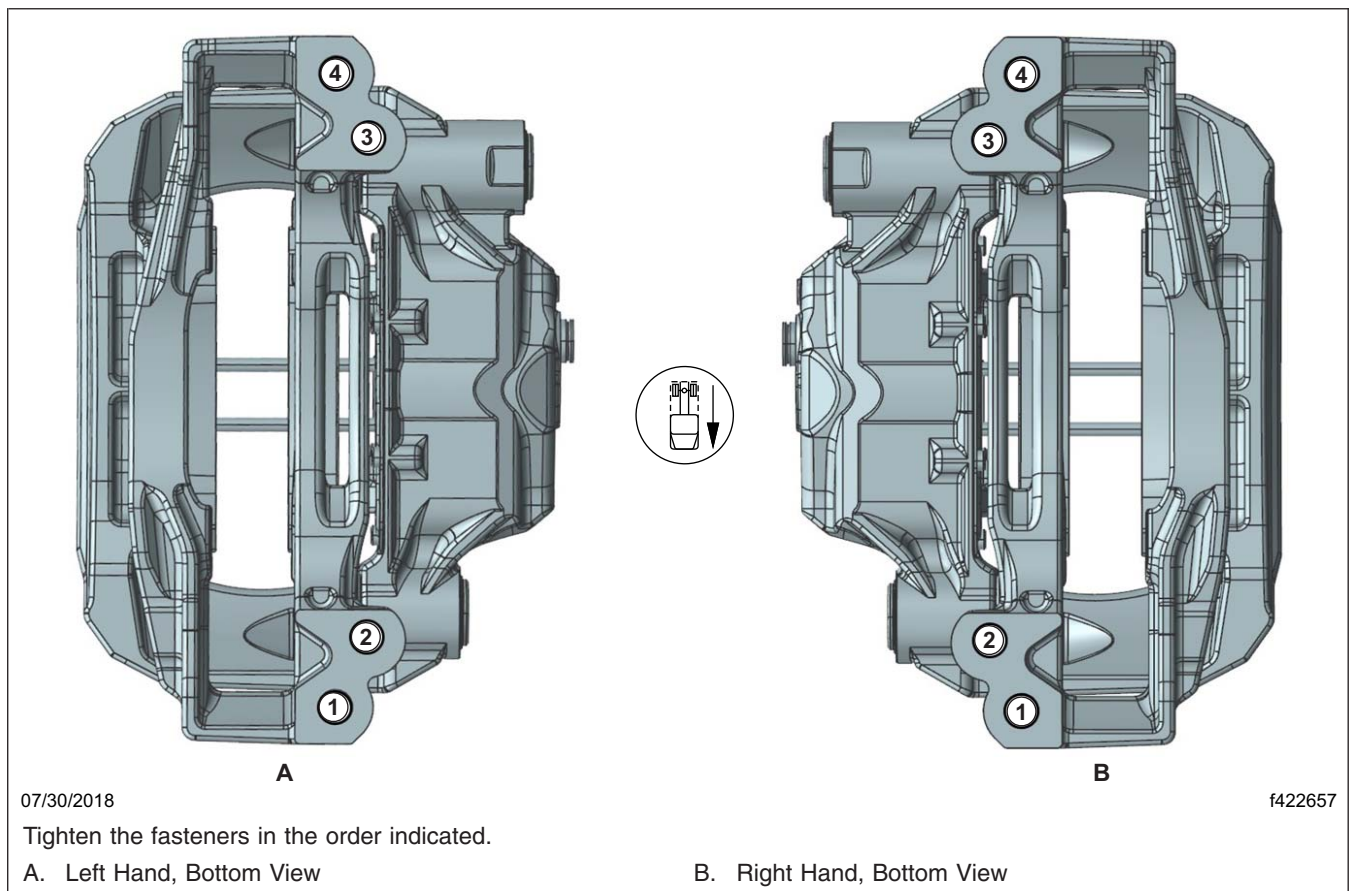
, Wabco Maxxus Radial Mounted Caliper Tightening Pattern
